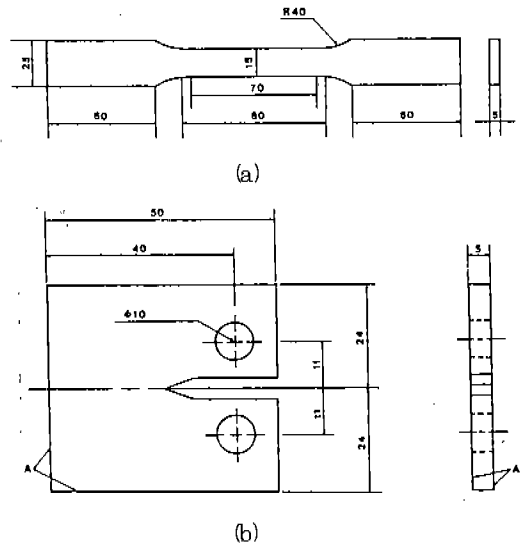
Configuration of test specimens for Tensile (a) and Fatigue Test (b)
